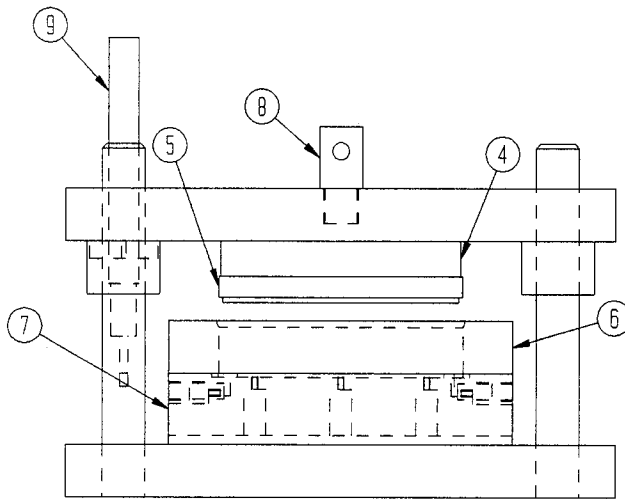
Virginia Tech Fixture C - schematic drawing.
